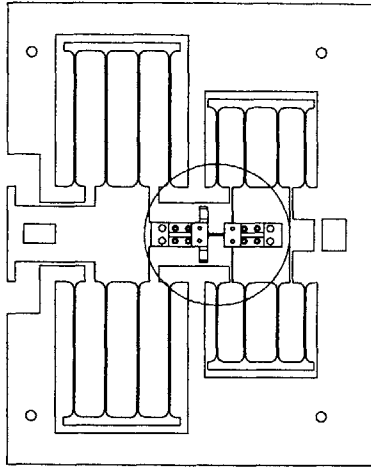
A cut away view of the high load testing machine showing assembly of the foil tension grips.
